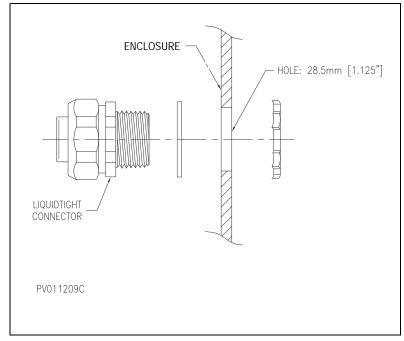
Mounting the liquidtight connectors for flexible protective conduit
